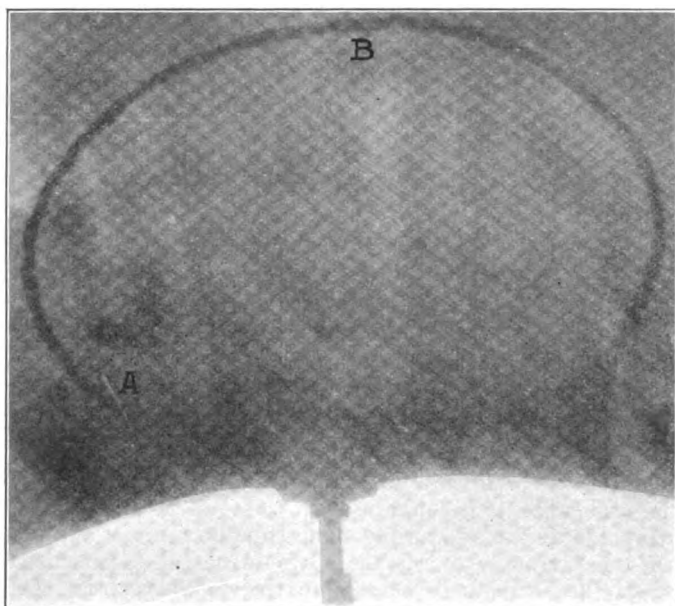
X-RAY PHOTOGRAPH OF A SIDE VIEW OF PART OF A 40 X 8-IN. INNER TUBE WITH THERMOCOUPLES AT A AND B, EACH KEPT IN POSITION BY WRAPPINGS OF PIANO WIRE THAT ARE SOLDERED TO THE STEM
